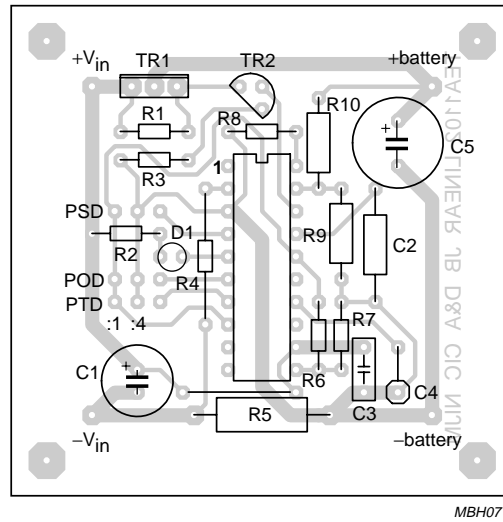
Component side of printed-circuit board (linear application) scale 1 : 1.
